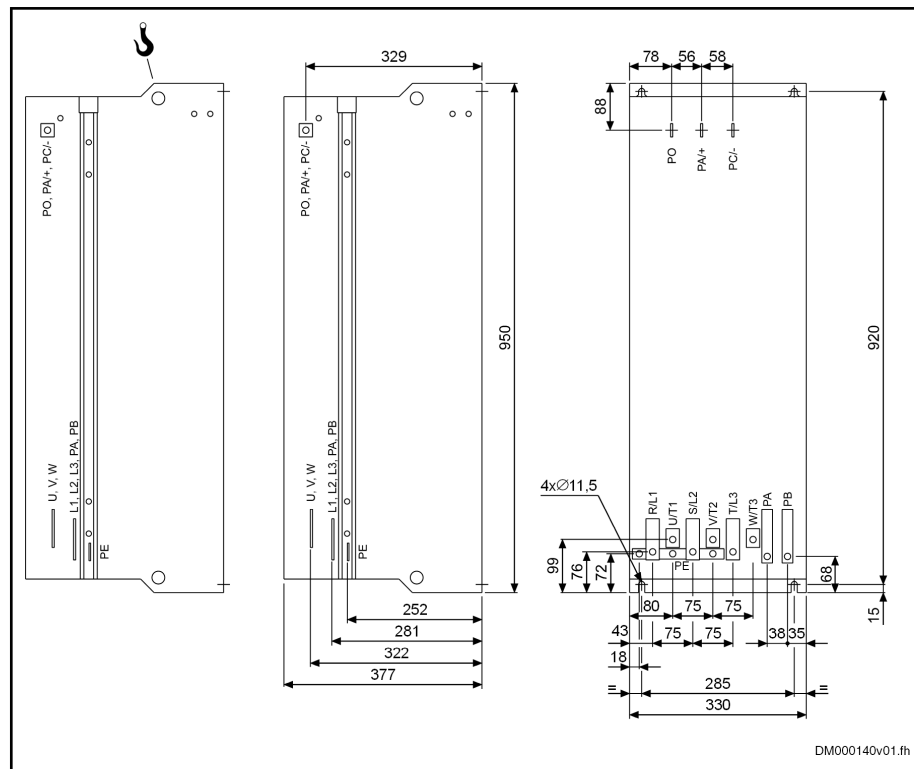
Dimensions IndraDrive HCS04.2E-W0420
